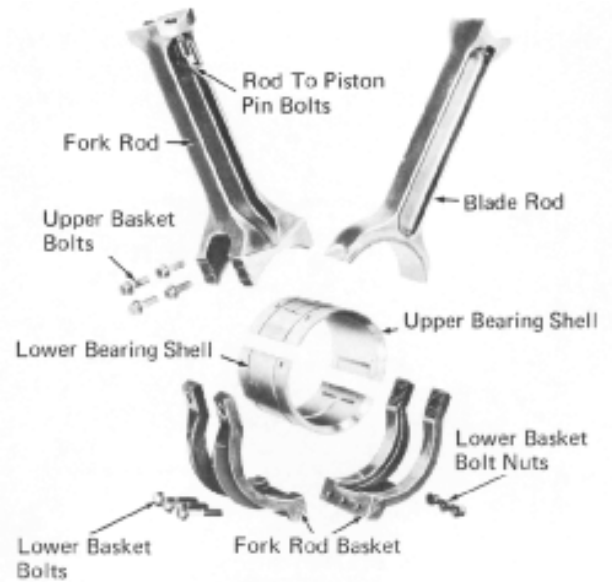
"Connecting" Rods, Bearing Shells, And Basket
